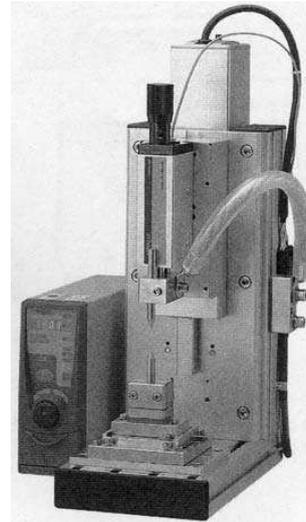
Motor driven welding pressure mechanism [MH-110A].
